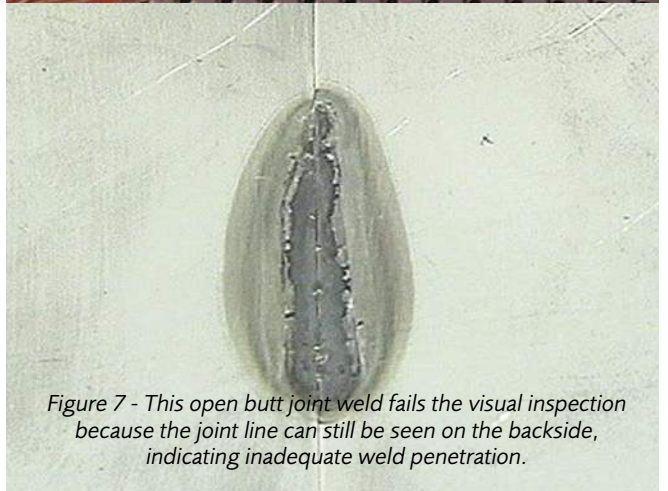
This open butt joint weld fails the visual inspection because the joint line can still be seen on the backside, indicating inadequate weld penetration.
